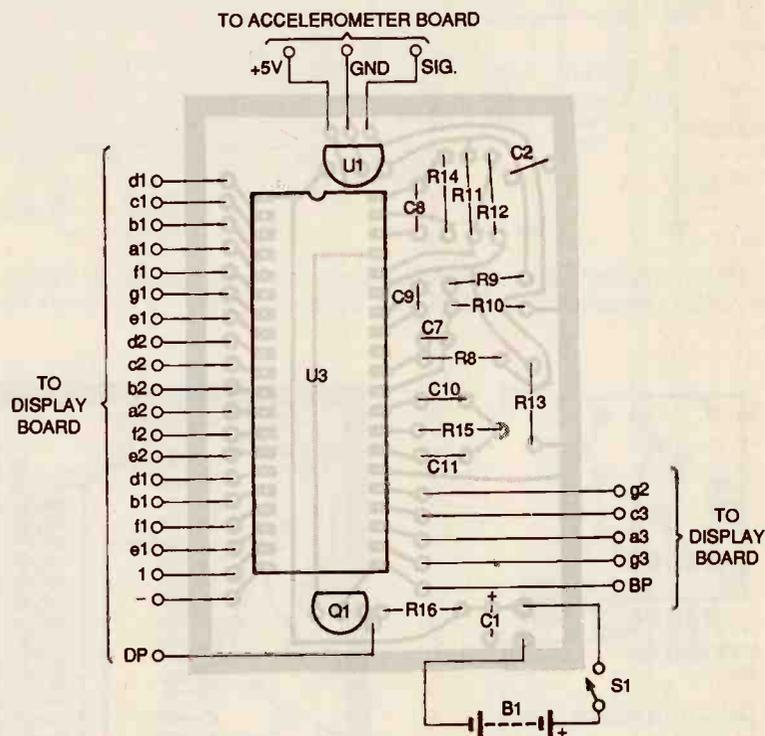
On-board component placement on this A/D-converter board is pretty simple. Just be careful when making the off-board connections to the display board. Also, note the placement of the 3-pin header.
